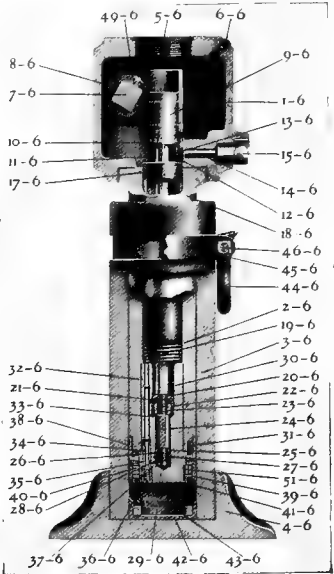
Universal Railroad Hydraulic Jack. Richard Dudgeon.
